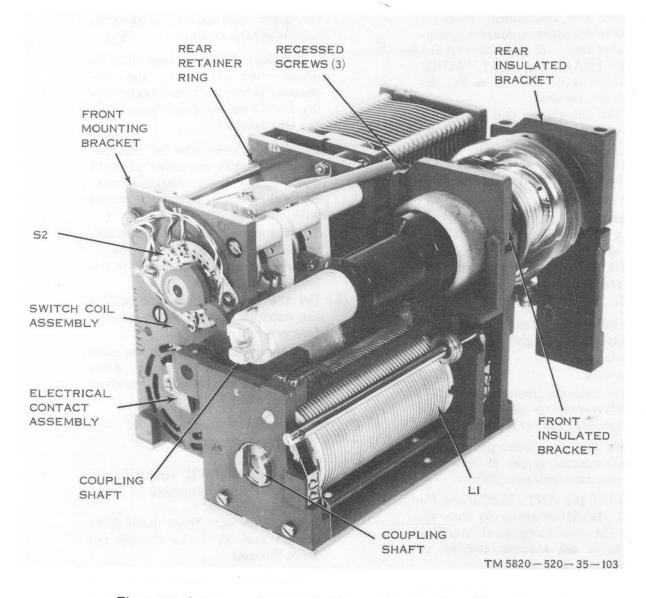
Antenna coupler assembly 2A3, parts location, front oblique view.
